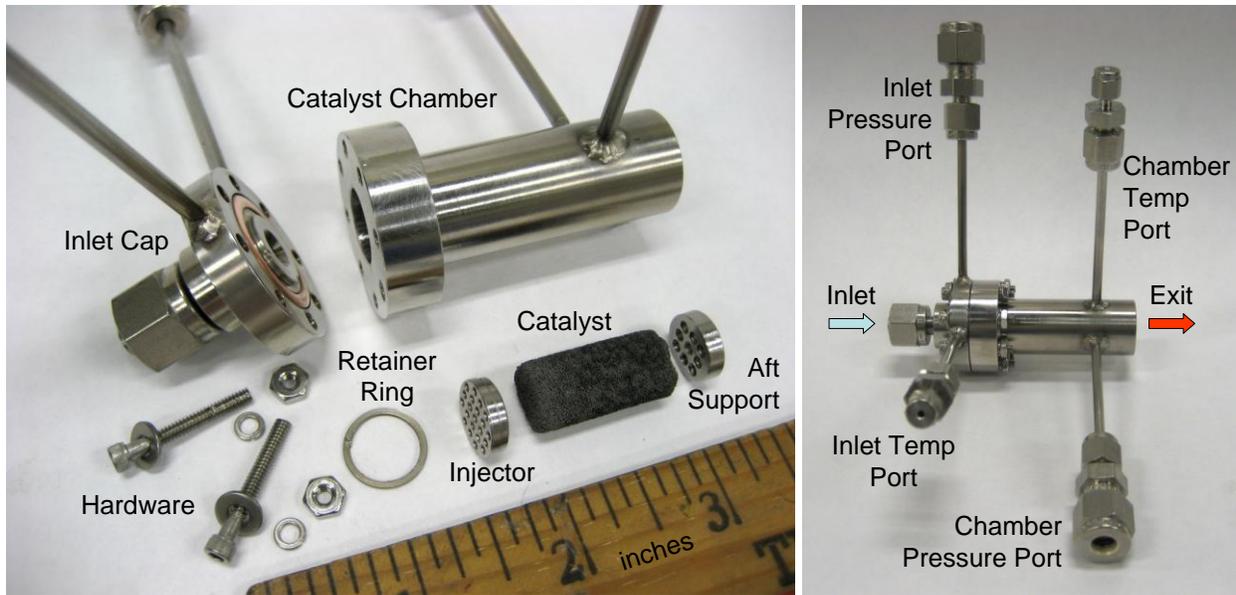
Completed subscale gas generator hardware shown disassembled (left), and assembled (right).
